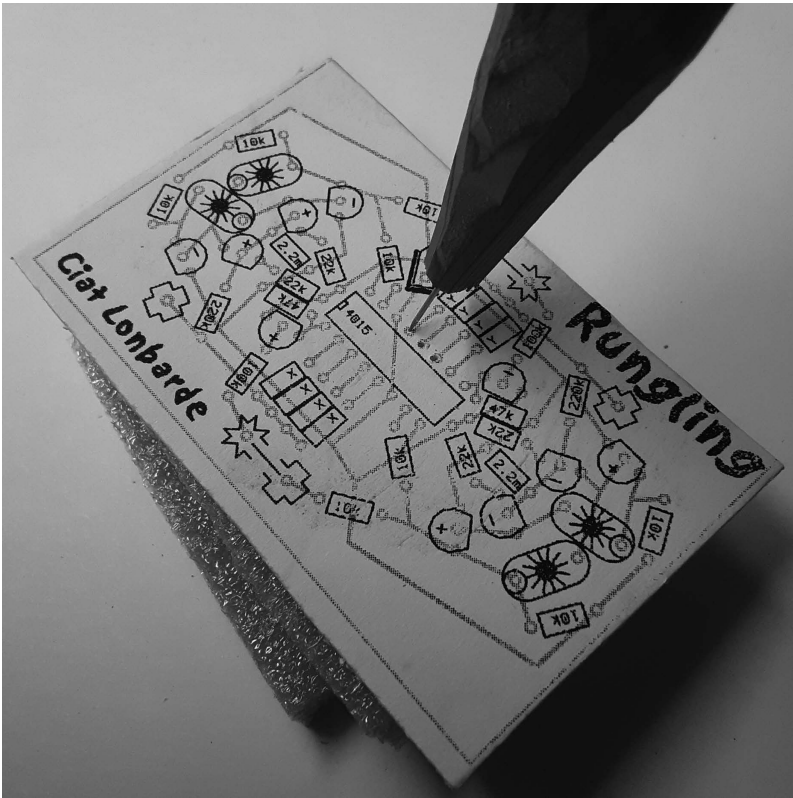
A paper circuit: cardstock and glue sandwich. From the top side, pierce each hole with a bodkin.
